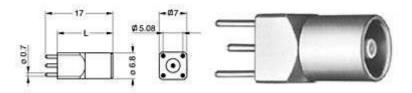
LEMO EPA.250.00.NTN Dimensions and Drawing
